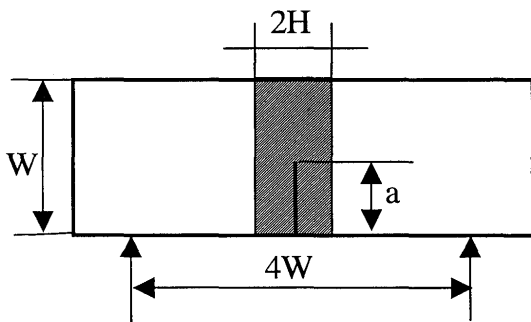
The three-point band specimen with weldment used in numerical analysis
